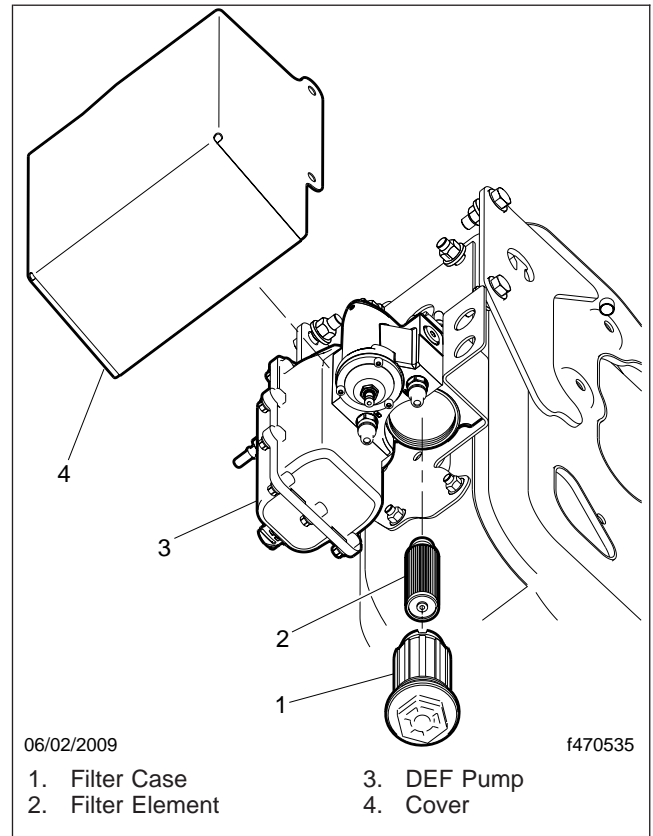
, DEF Filter Replacement, Detroit Diesel Engine
